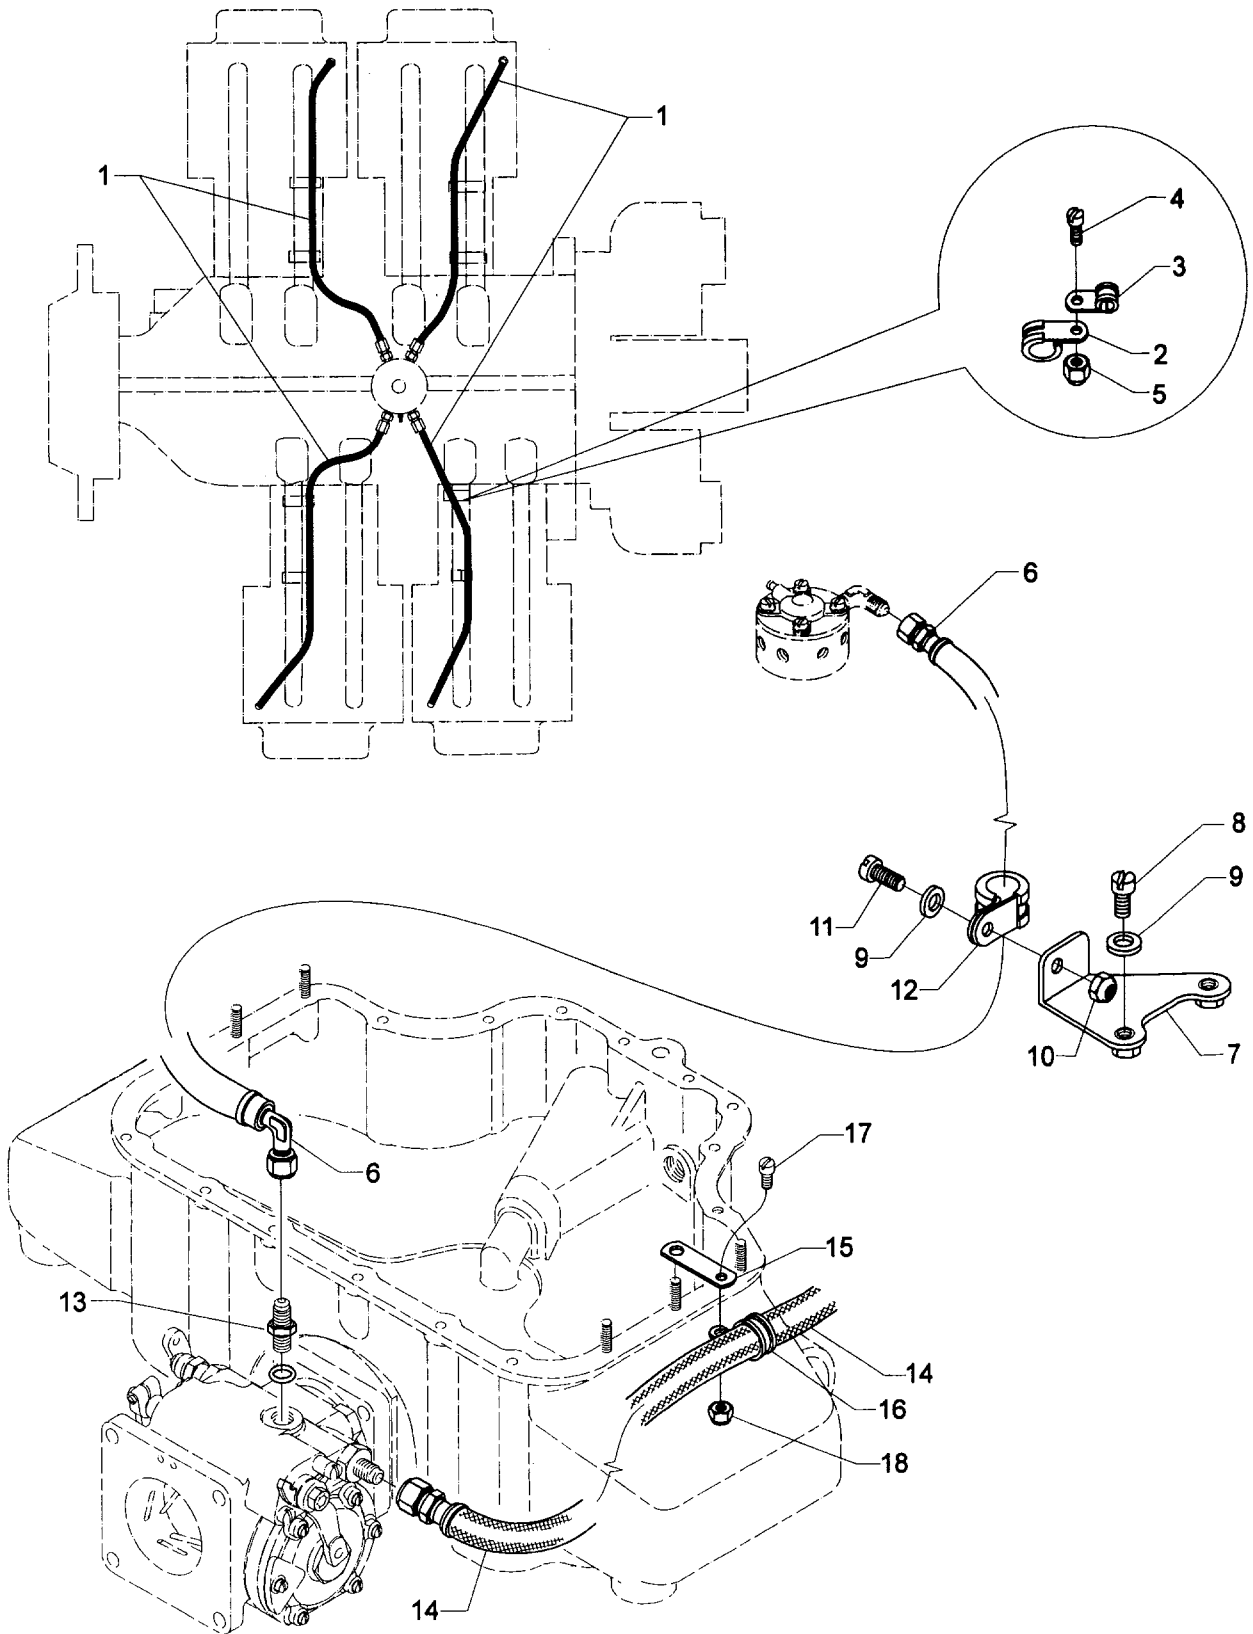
FUEL LINES, FUEL HOSES AND ATTACHING PARTS
